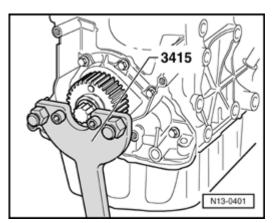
Counter-Holding Crankshaft Toothed Belt Sprocket With 3415
